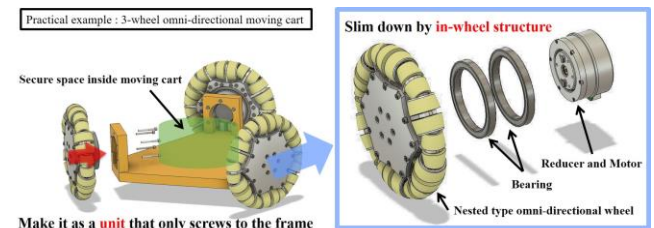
Usage example of in-wheel motor type omni-directional wheel.
